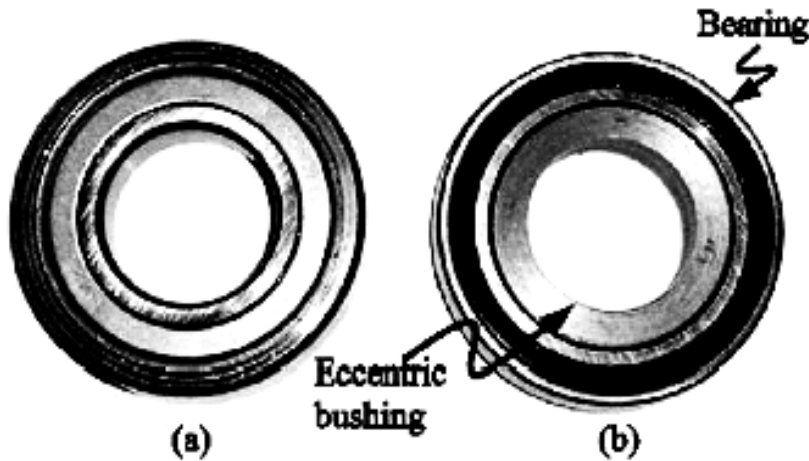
Creation of eccentricity (a) healthy bearing (b) eccentric bearing [Guillermo et al. 2006]
